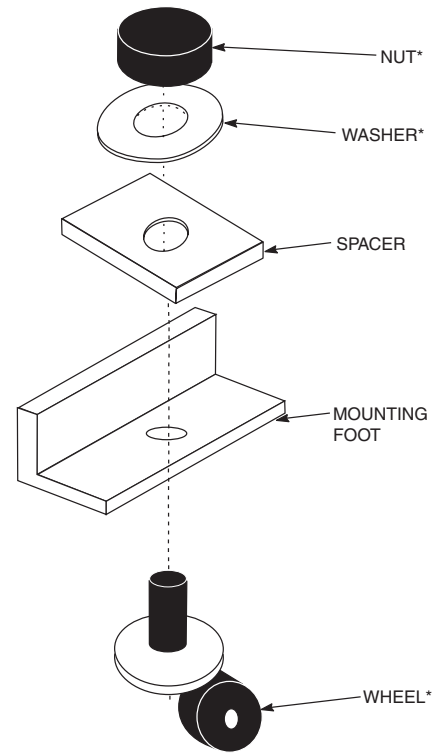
Mounting Wheel Assembly and Spacer to Mounting Foot, 30HWA,HWB Units
